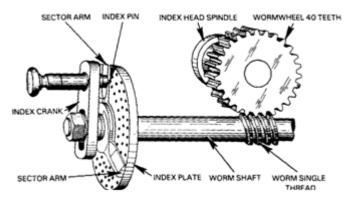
section through dividing head showing the worm wheel & warm shaft
